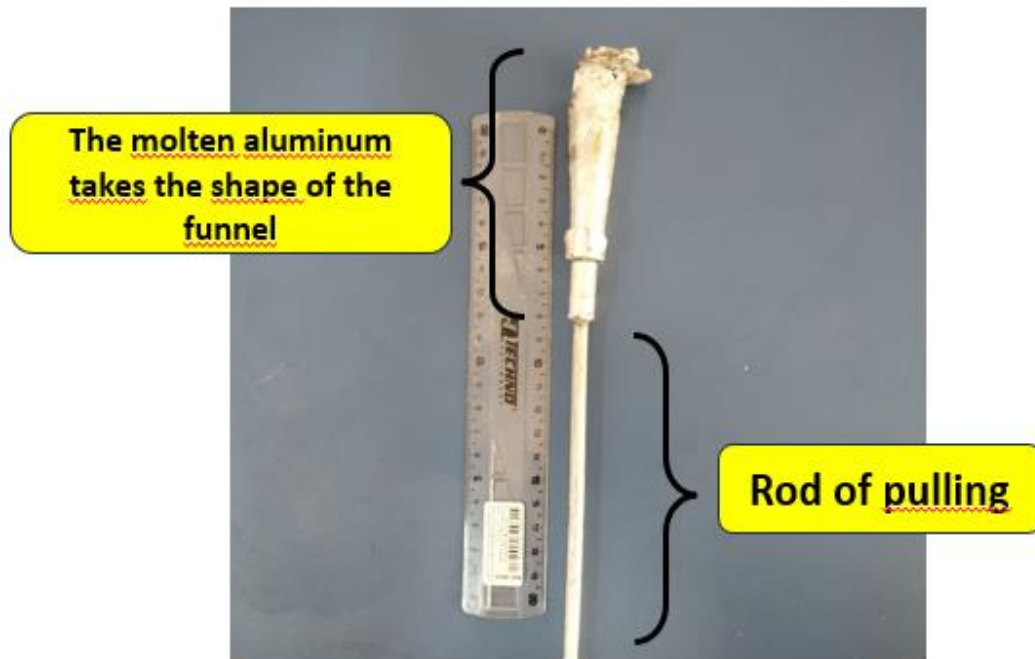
Aluminum alloy sample manufactured by continuous casting machine under mechanical vibration.
